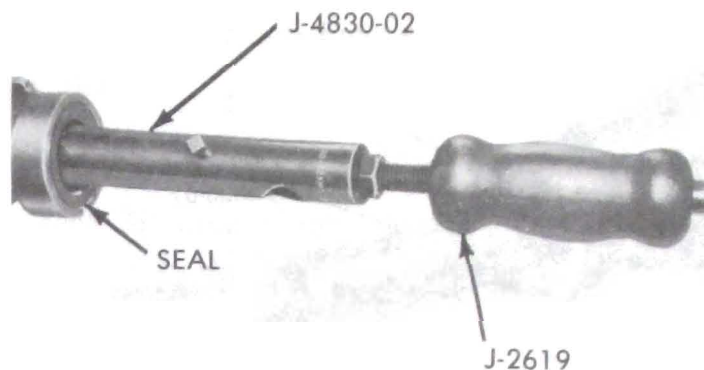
B-23 - Removing Rear Bearing Retainer Oil Seal
